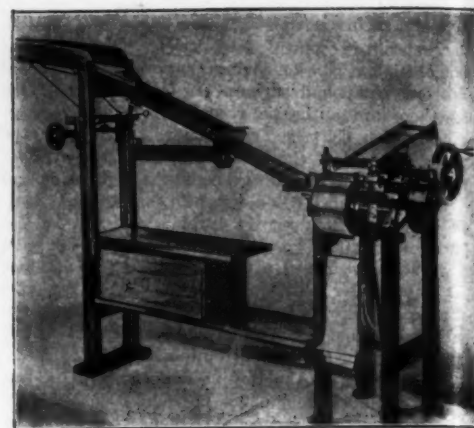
Pin-sticking machine which counts the pins and sticks them into papers.
